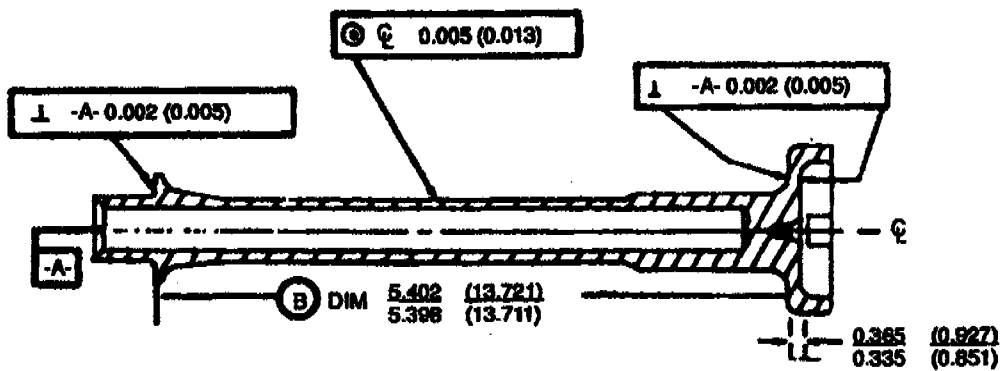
Measuring Runout of Power Shaft Through Bolt.
